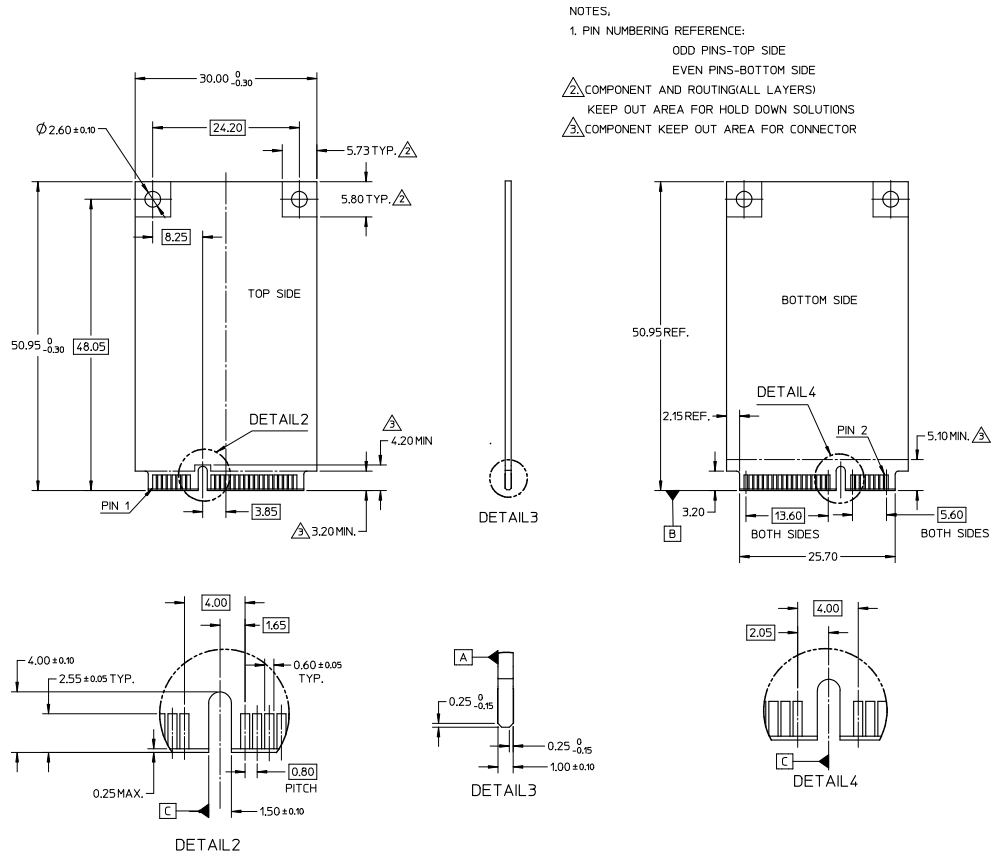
mPCIe PCB form factor. Units in mm. Extracted from [107] (modified).
